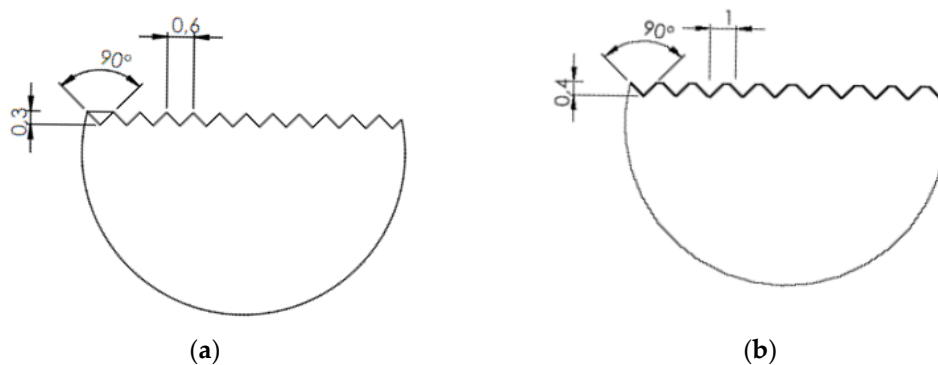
Sonotrode used fore welding the sheets (b) Sonotrode used for sealing the tubes.
